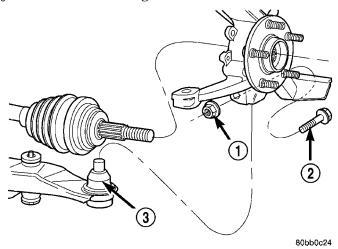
Steering Knuckle at Lower Control Arm Ball Joint
